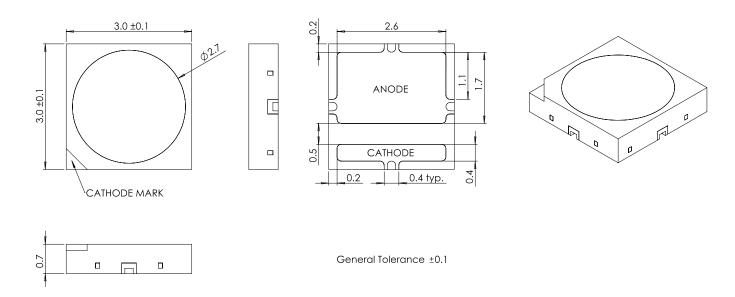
Mechanical dimensions for LUXEON Versat 3030 HP CW 150.
